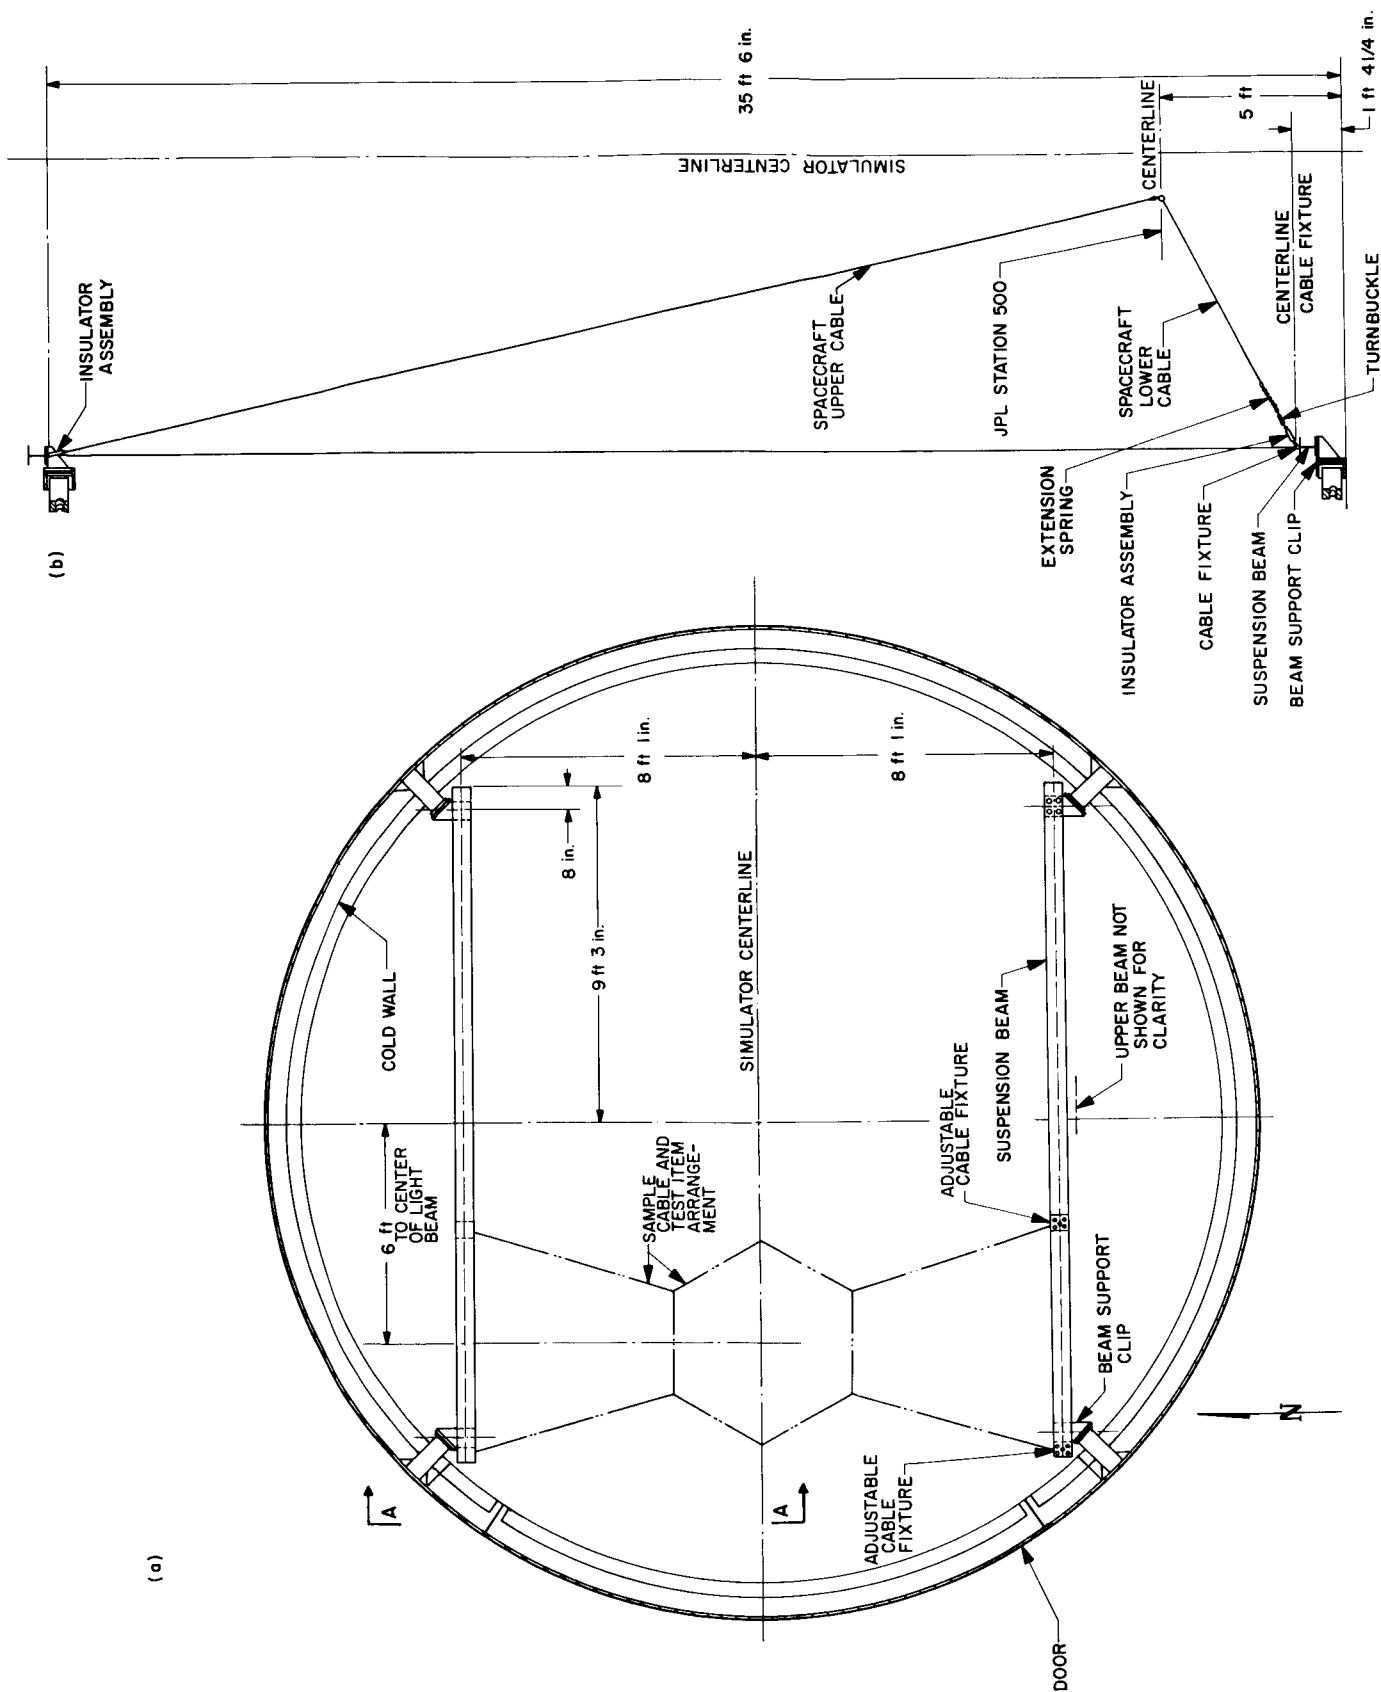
Suspension fixture assembly for the 25-ft space simulator: (a) plan view, (b) cross-section at A-A
